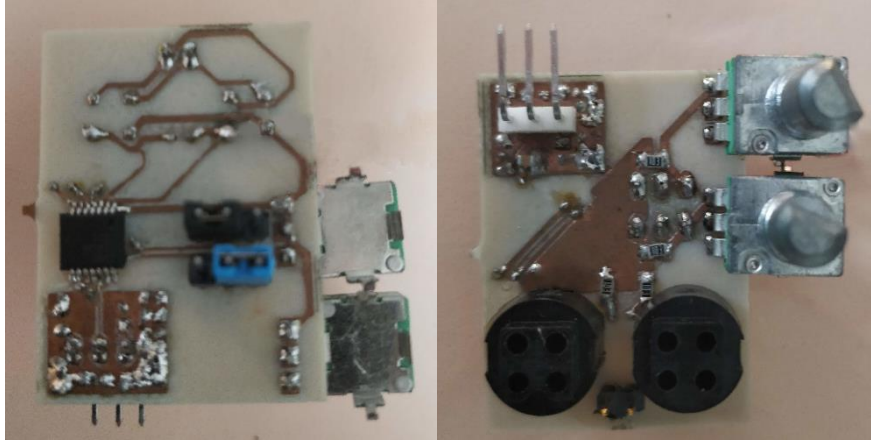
PCB of design of voltage divider and Wheatstone bridge
